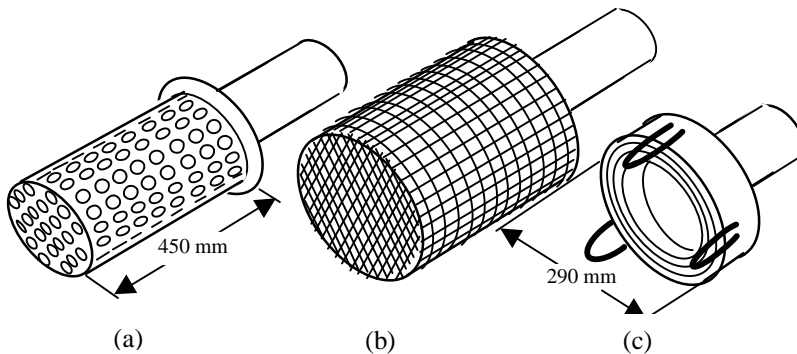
The three filters tested in the obstacle trial: (a) Abbey filter, (b) Weldmesh filter, (c) Ring filter
